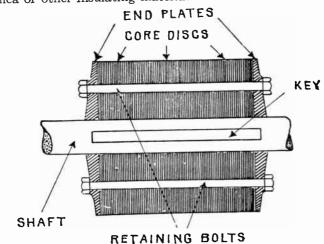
Laminated armature core with through retaining bolts. In the larger sizes, these bolts are used instead of a nut threaded on the shaft on account of the large size of the latter.
